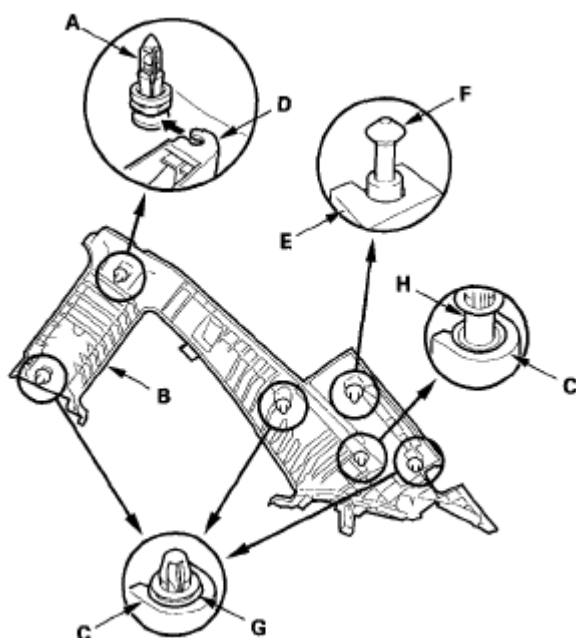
Removing Clip From Removed Quarter Pillar Trim
